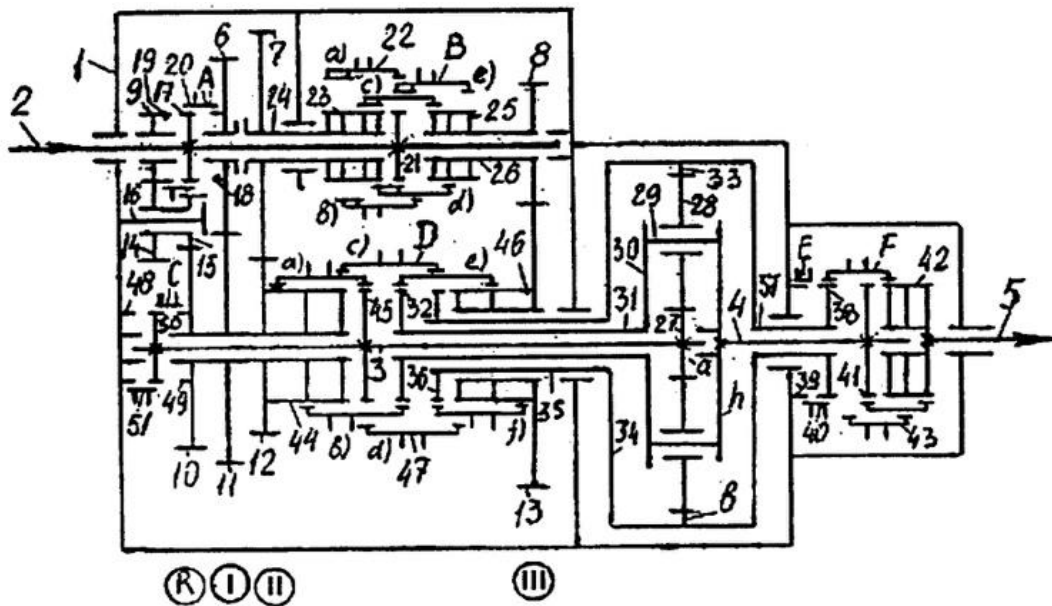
Kinematic scheme of the non-coaxial shaft-planetary multiple-speed gearbox, type 24R10 [11].
